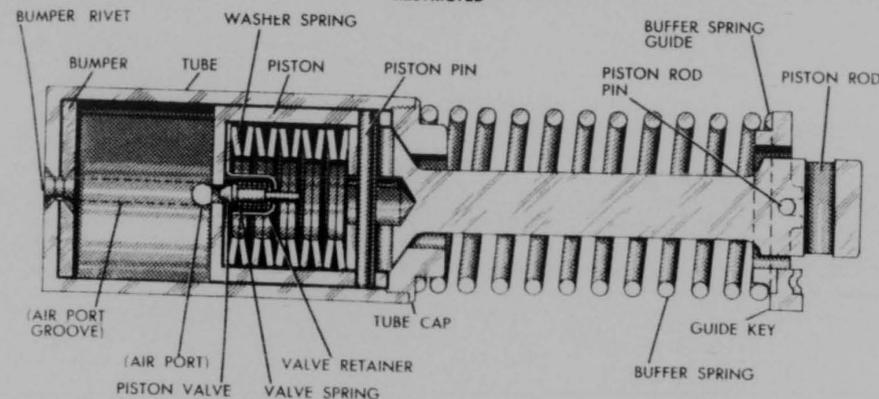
A. Barrel Buffer Assembly with Piston in Forward Position—Sectional View.
